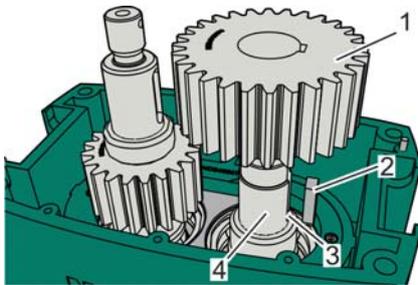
Lifting the toothed wheel from the cutter block shaft, example
